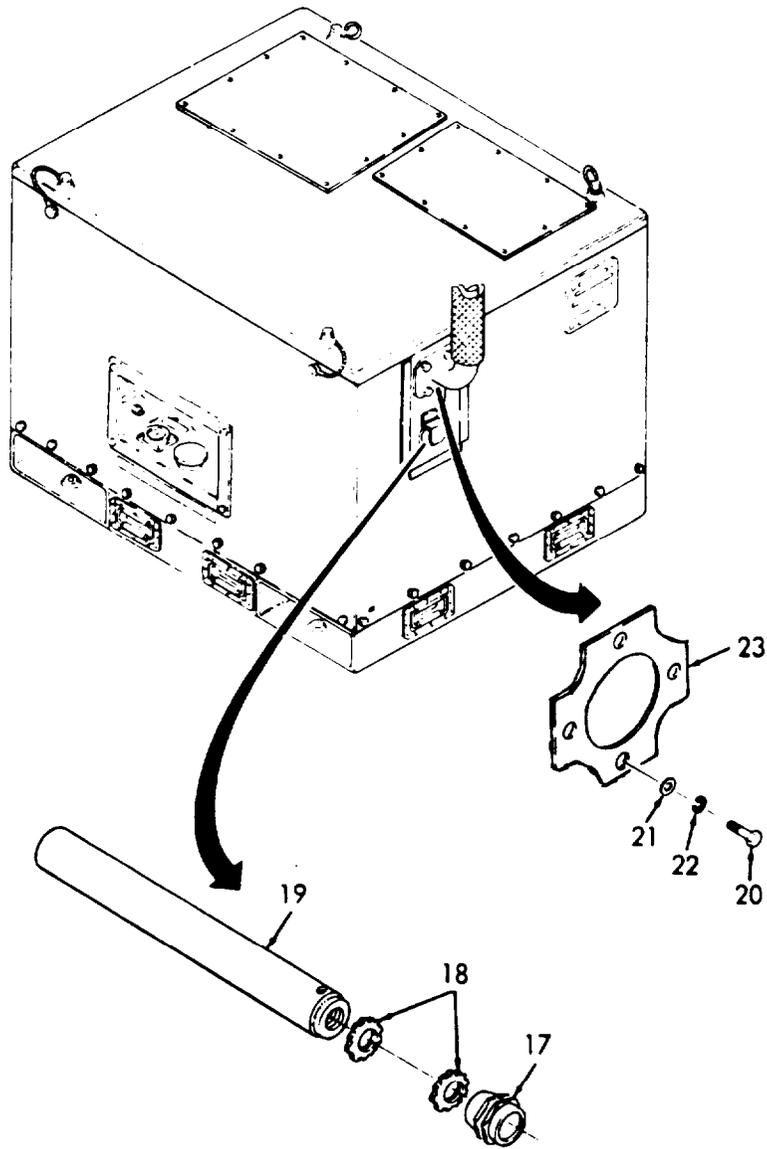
Heat Exchanger Assembly (Sheet 2 of 2).
